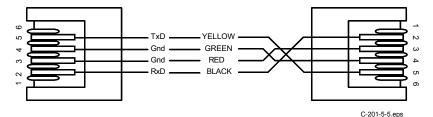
Model 2001 RJ-11 Cable Assembly Wiring Details
